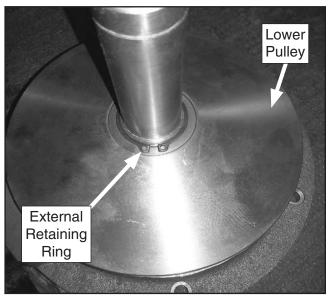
Upper pulley removed to expose retaining ring and lower pulley.
